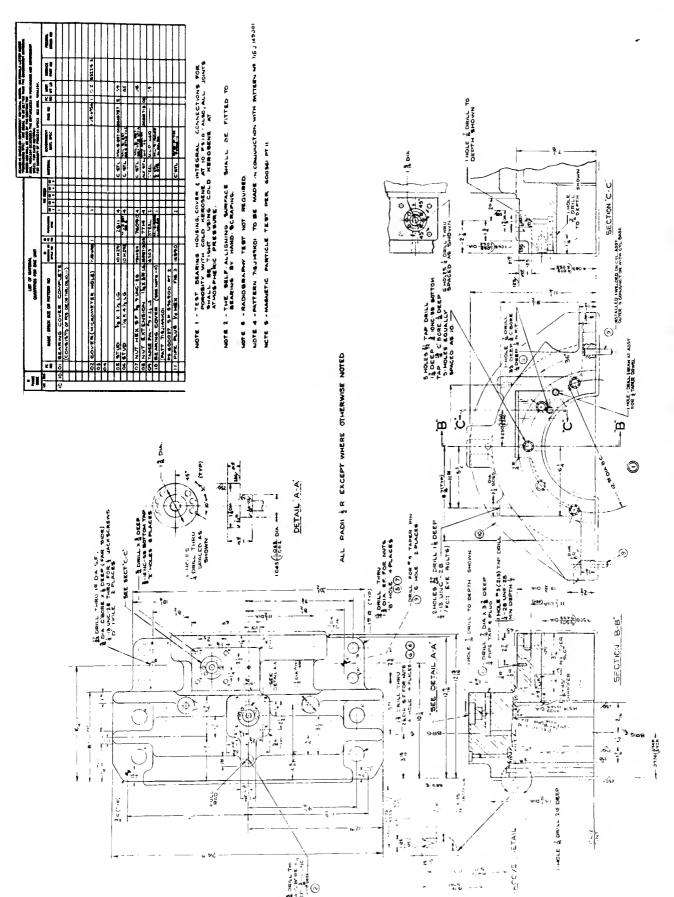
LP Turbine Thrust End Bearing Cover -- New Design.
